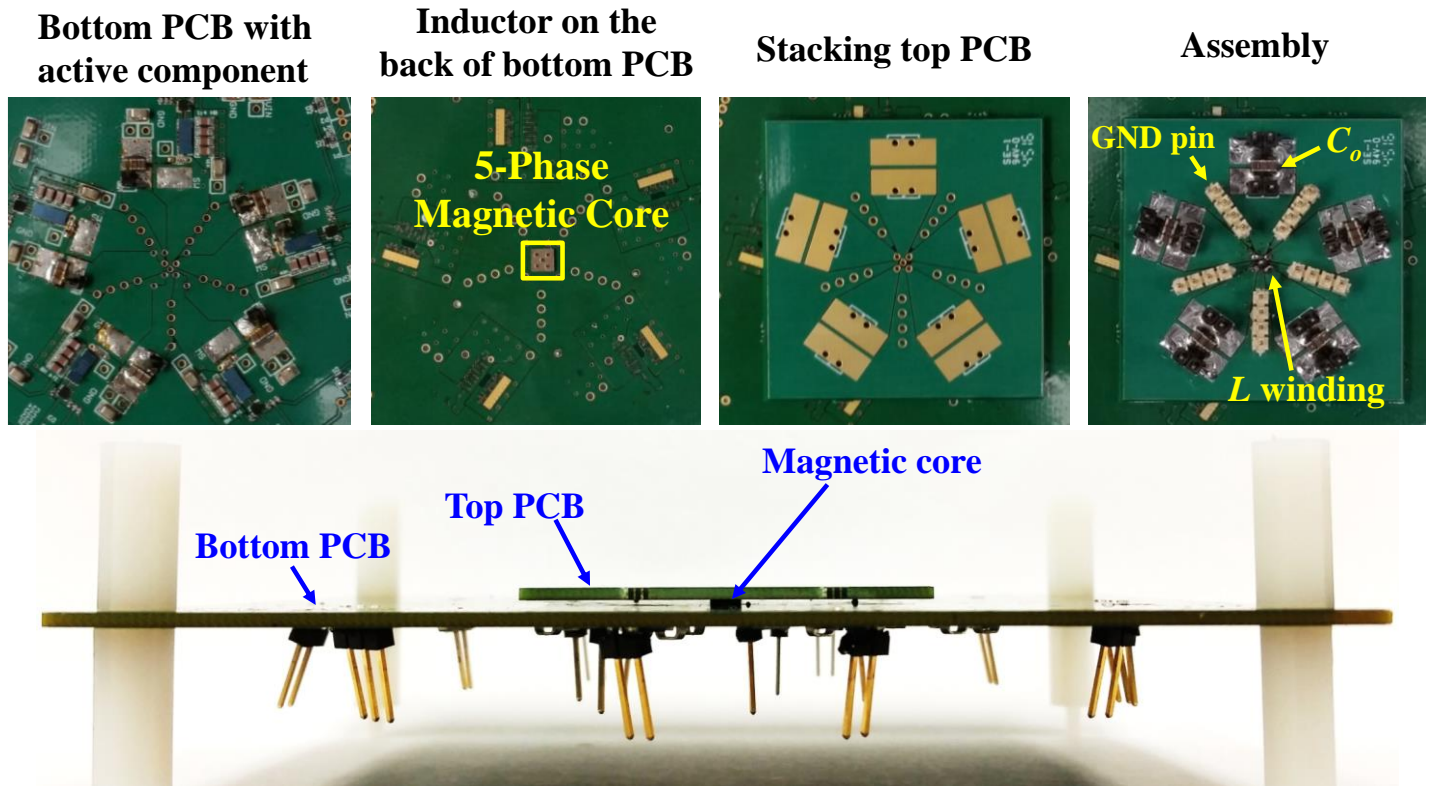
Testing board with 3D stacked structure of magnetic core within PCB. The step-by-step building process is shown in the top pictures, and the 3D stacked structure of magnetic core within PCB is shown in the bottom picture. The bottom PCB has the same active components (switching devices and drivers) and layout as the five-phase testing board shown in Figure 4.15.
